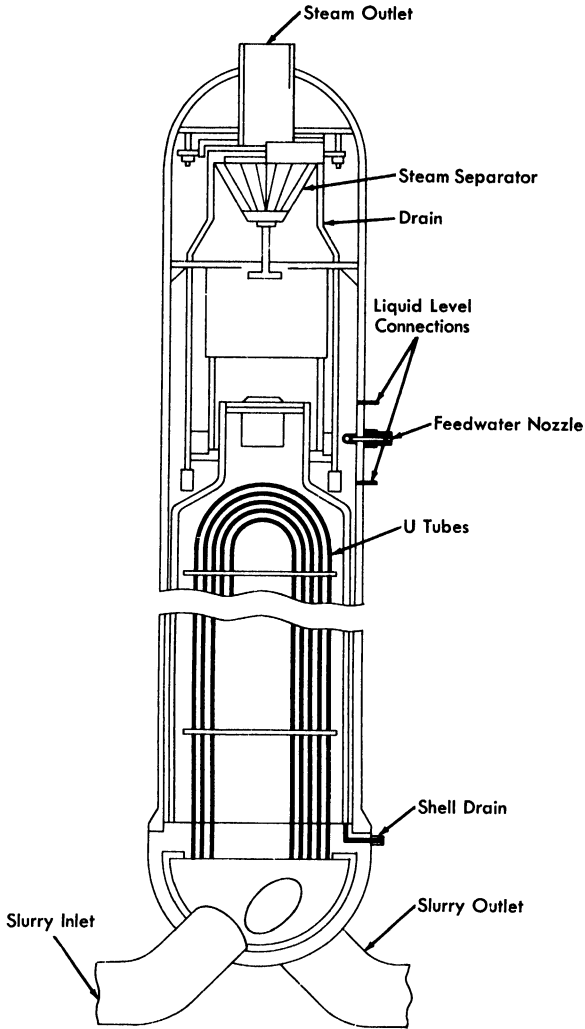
Steam generator for Pennsylvania Advanced Reactor (courtesy of Westinghouse Electric Corp.).
